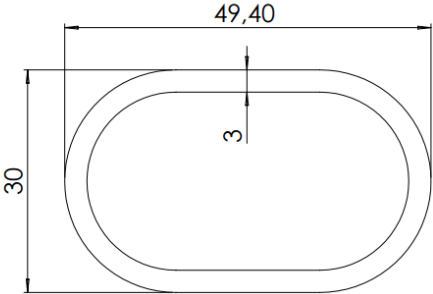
Section geometry of the test sample (All dimension are in mm)
